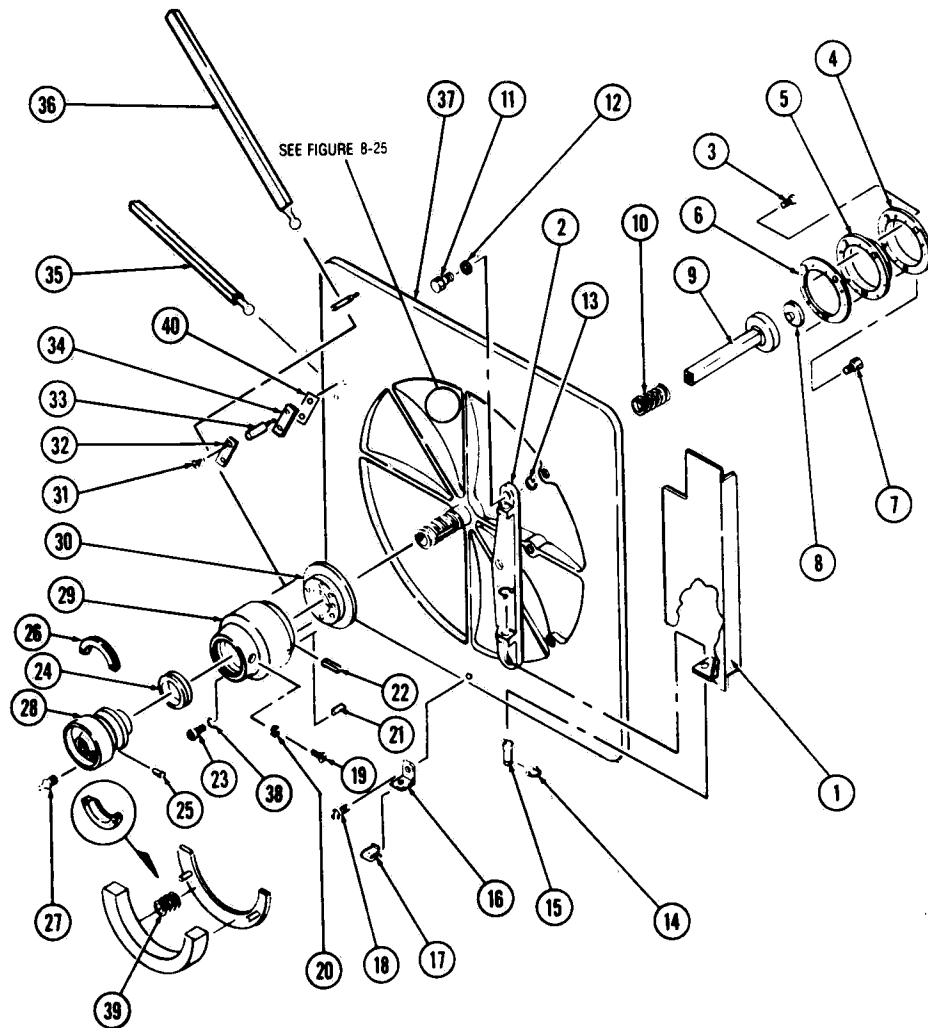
DOOR LOCK AND HINGE ASSEMBLY (Part 1 of 3).
